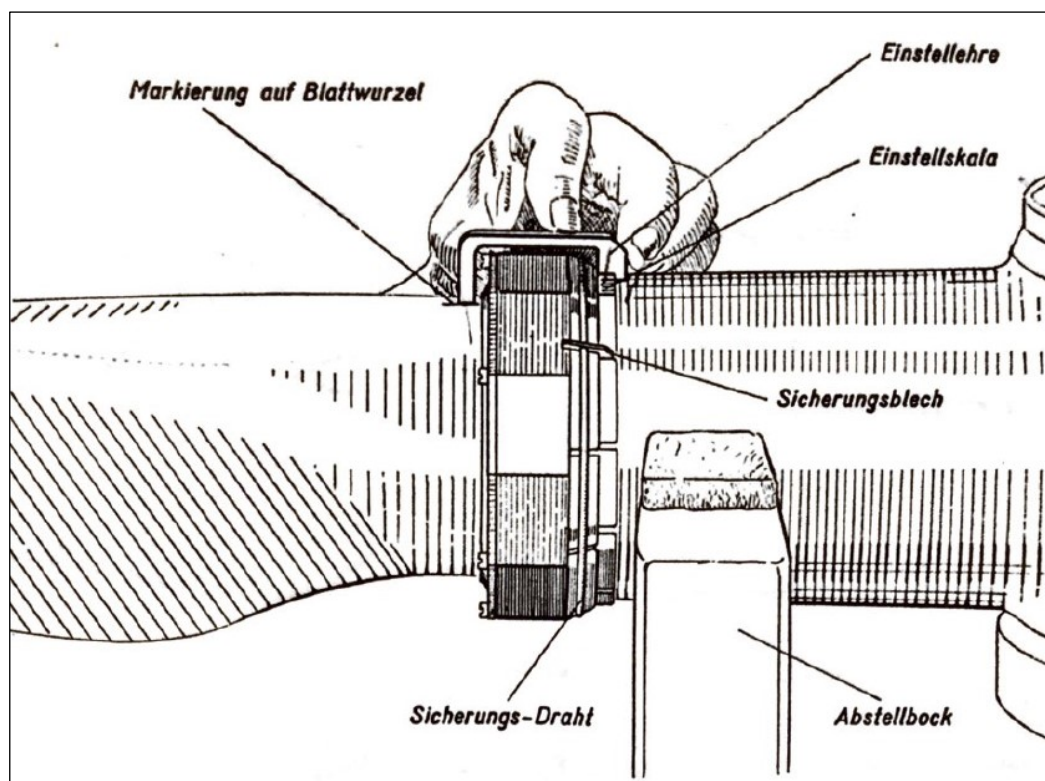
Inspection using the setting gauge. Source: “Junkers Metall-Luftschrauben” (Junkers metal propellers).
